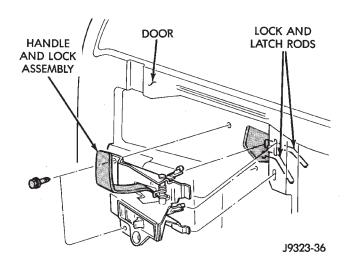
Rear Door Inside Latch Release Handle REAR DOOR INNER BELT SEAL
